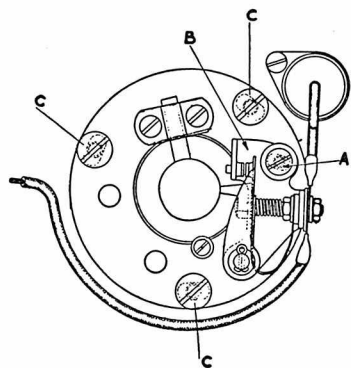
View of models 4F, 6F and 9F breaker point assembly.
